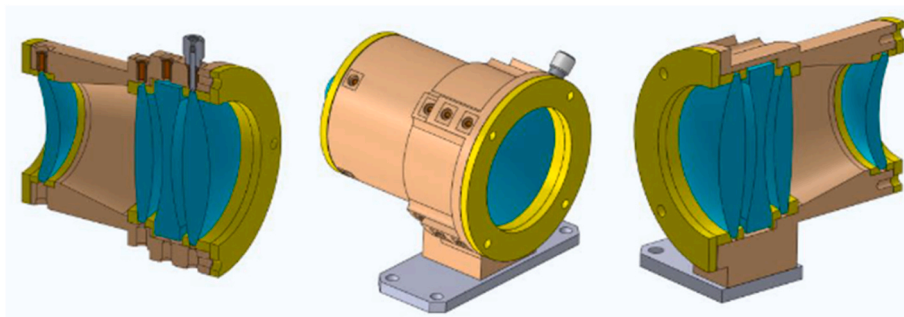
Preliminary 3D drawing of detector optics in their holder.
